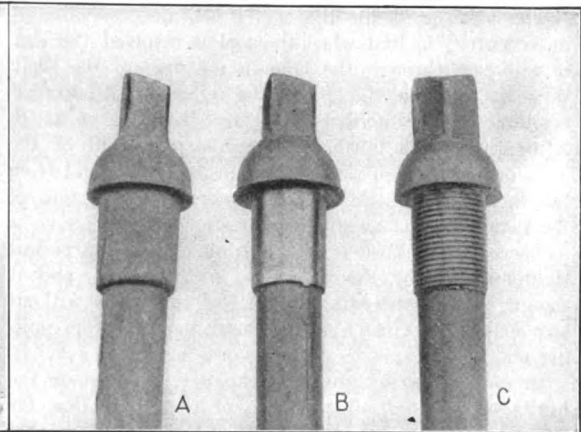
SEQUENCE OF MACHINING OPERATIONS
